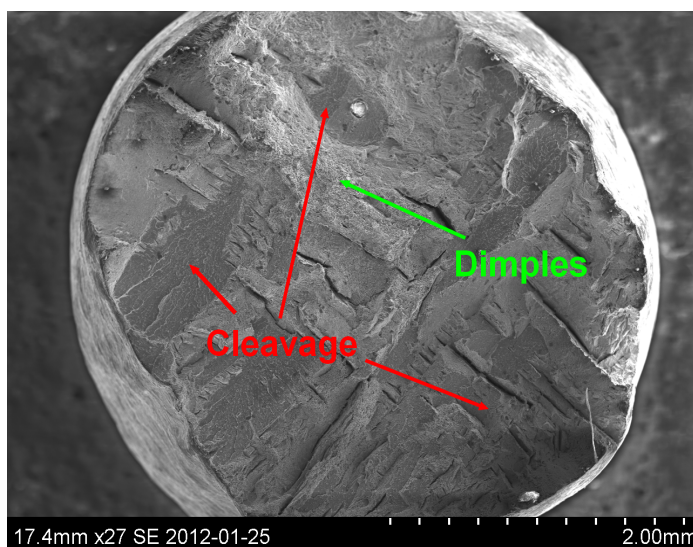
Fracture section of *1,5Ni\_surface cross weld* at  $20^{\circ}\text{C}$
